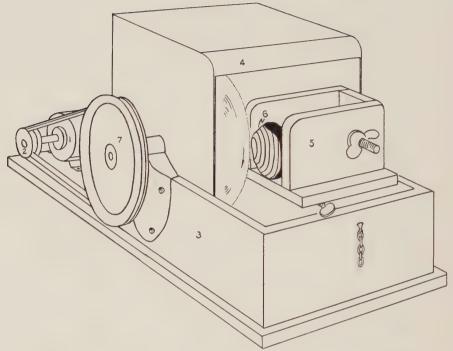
A Ready-made Diamond-Sawing Outfit. 1, motor; 2, pulley; 3, tin-lined box; 4, splash hood; 5, sliding clamp; 6, material in clamp; 7, arbor pulley.
